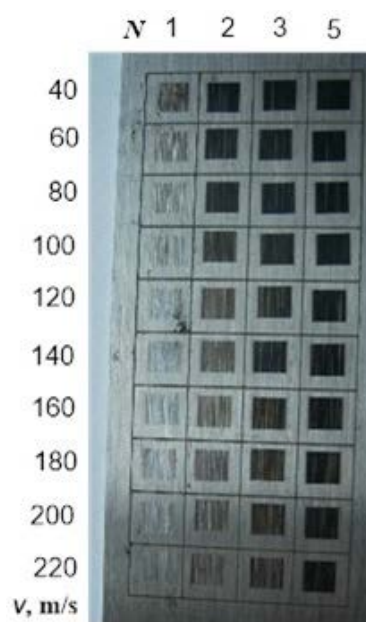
Sample of tool steel HS6-5-2-5 marked with fiber laser
